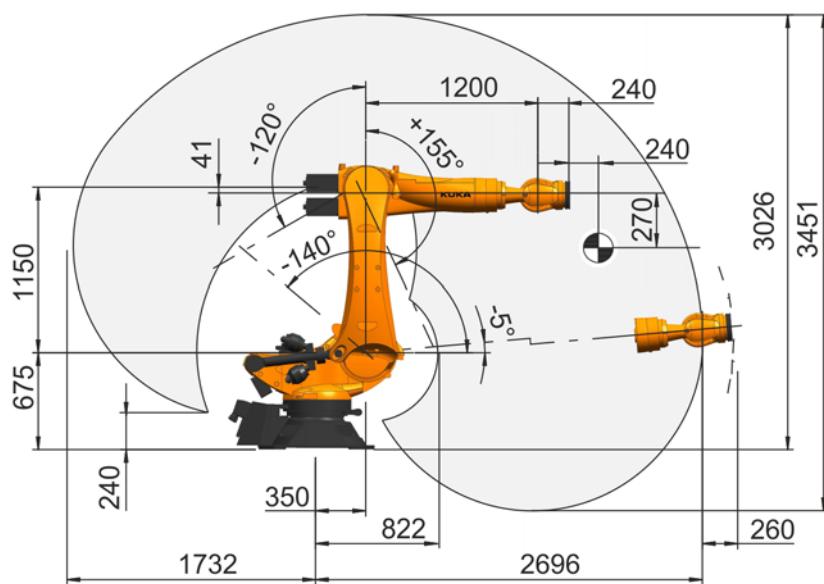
KR 240 R2700 prime, working envelope, side view
